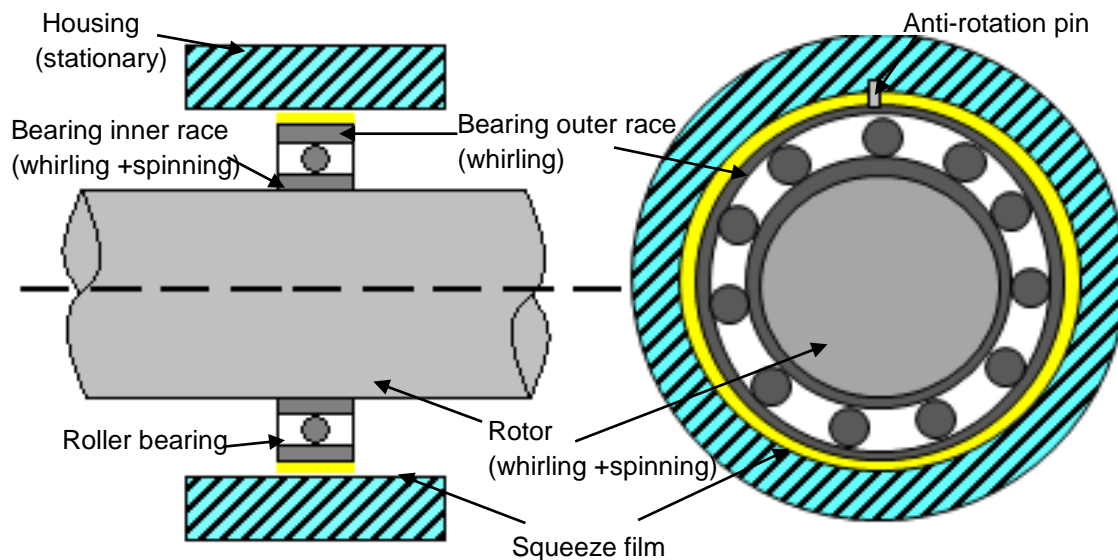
Schematic drawing of a rotor supported on ball bearings and a squeeze film damper (SFD)
